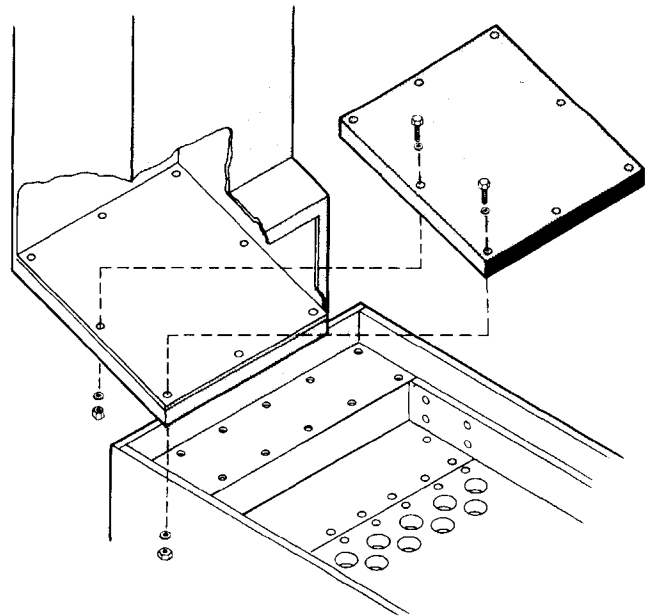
Installation of a resilient impact pad on the bottom of the screen feed chute.
